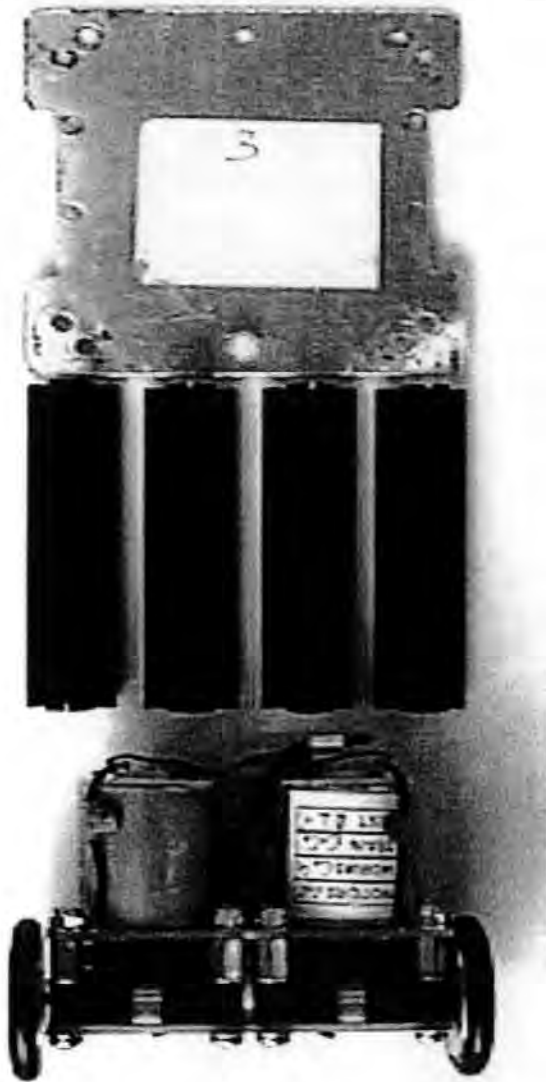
Mechanical parts showing the base, pillars and motor/gearbox units
